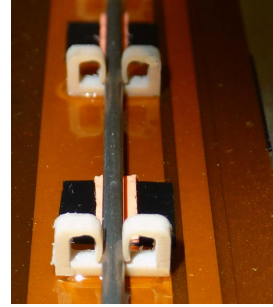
Assembled spring-clamp-v2 prototypes with an evaporation tube.
